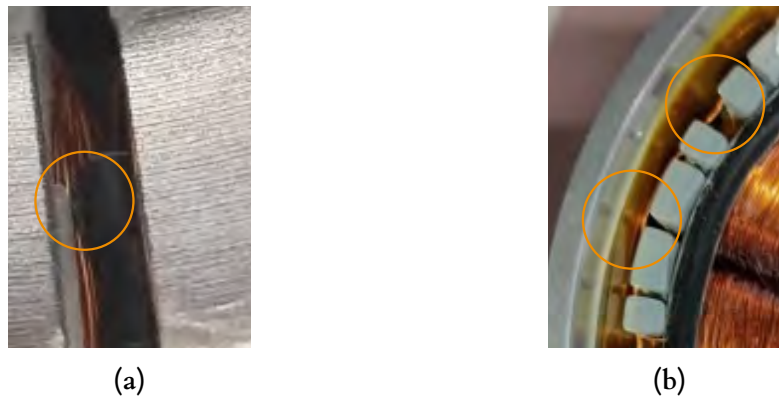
Manufacturing defects revealed during the pre-potting PDIV measurements (a) broken thermoretractable tube in the thermistor, and (b) winding wire almost touching the housing in the routing.
